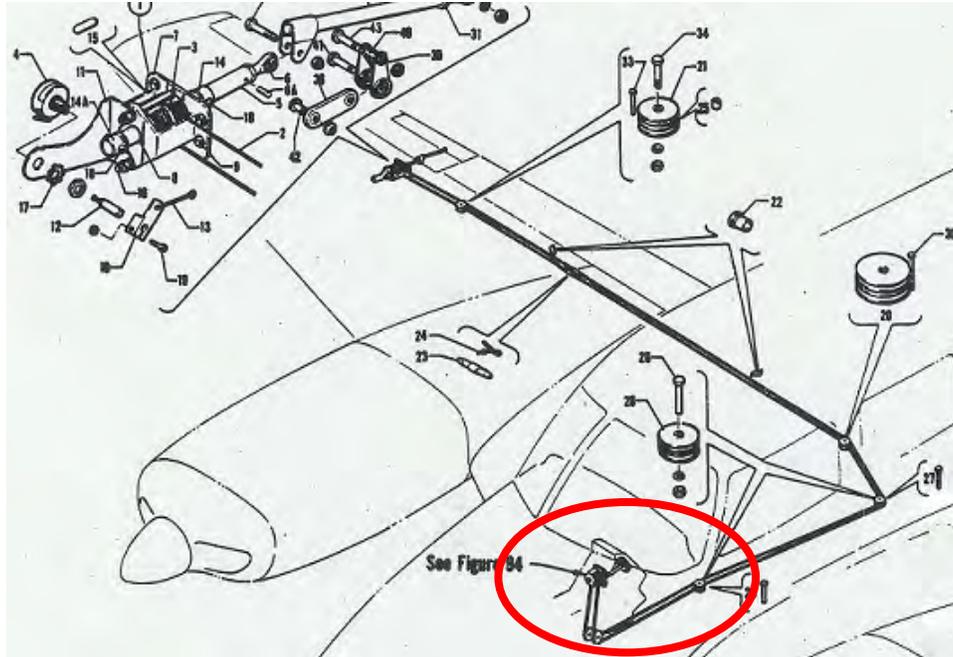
Location of Coaxial Cable Chafed by the Aileron Trim Tab Cables
